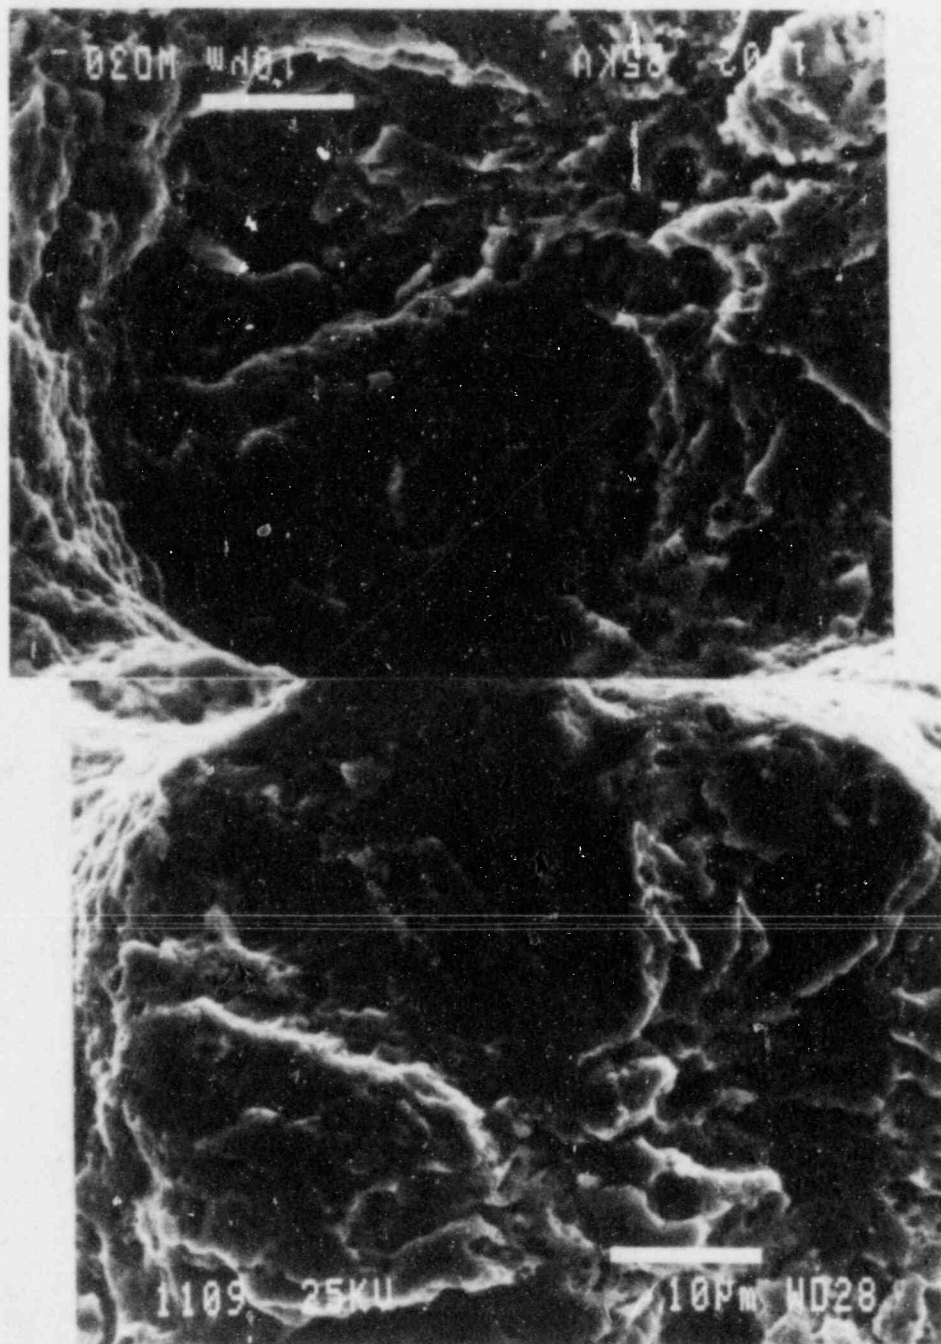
Increased magnification and matching fracture surface view of Fig. 22.
